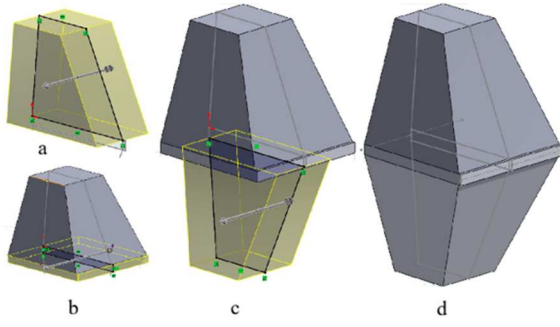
Single segment design procedure: (a) extrusion of the upper section, (b) extrusion of the middle section, (c) extrusion of the lower section, and (d) final design of a single segment.
